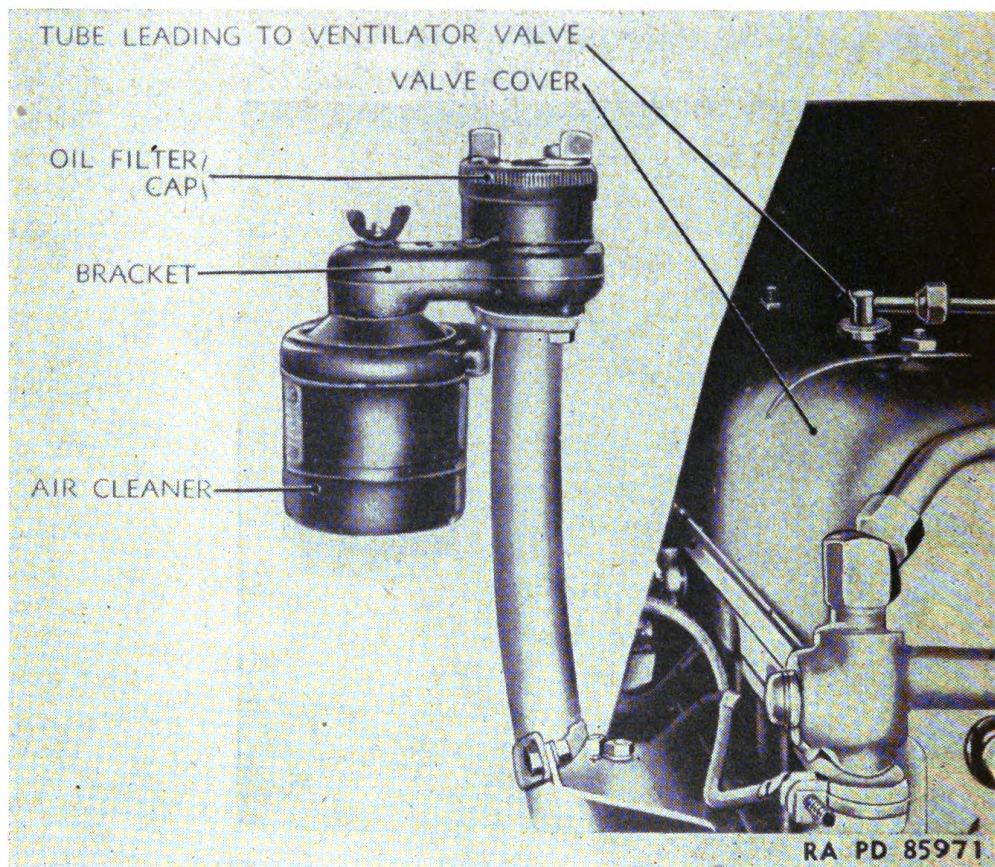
Air cleaner on crankcase ventilator and oil filling tube.
